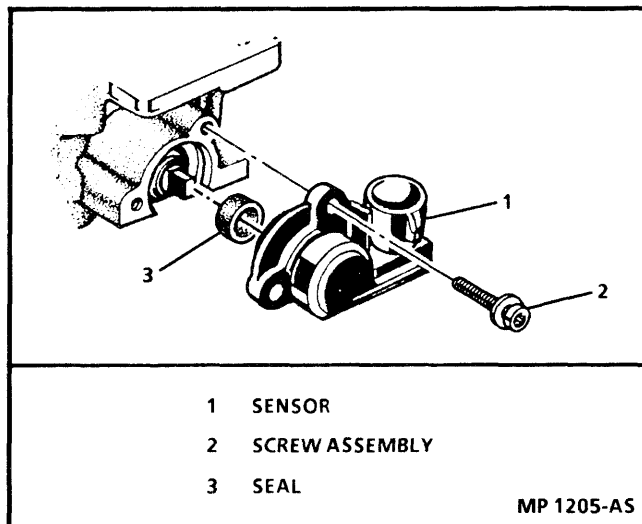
A-41 - Throttle Position (TP) Sensor - TBI
